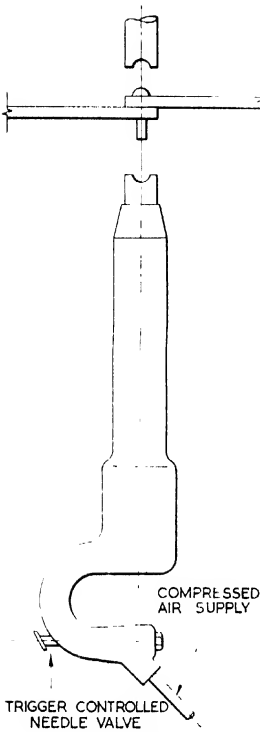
PNEUMATIC-TYPE RIVETING MACHINE
